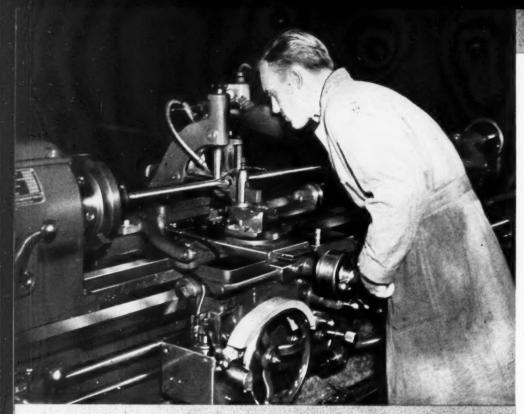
Chasing Accurate Thread on a Long Tube that has been Filled with a Rod and Cerrobend to Provide Rigidity
